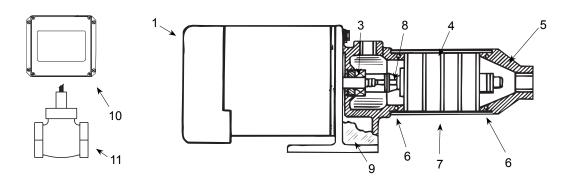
Cartridge Assembly Includes Discharge Bearing, Shaft & Coupling Assembly, Diffuser Plate, Impellers, Diffuser Bearings and Diffusers
